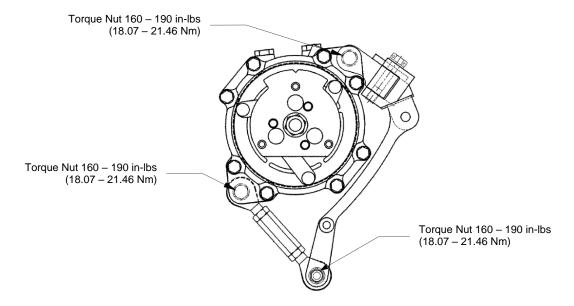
Compressor Mount Fasteners Torque Values (Flat & Poly V Belt)
